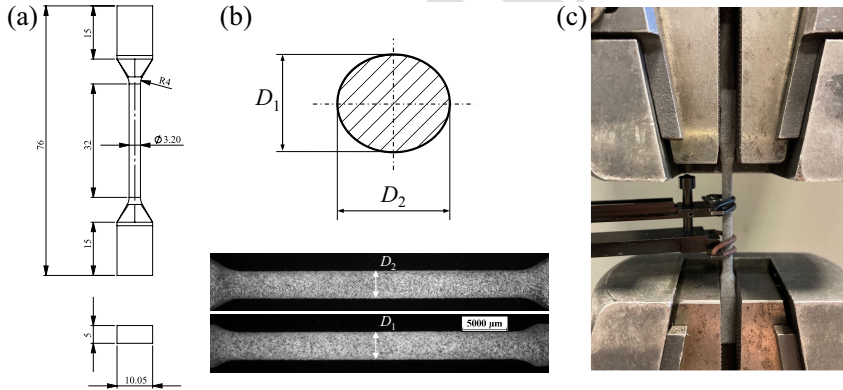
(a) Design of B specimen, (b) schematic representation of the cross-section of as-built B specimens and stereo-optical images in the two orthogonal planes and (c) tensile test on B specimen.
